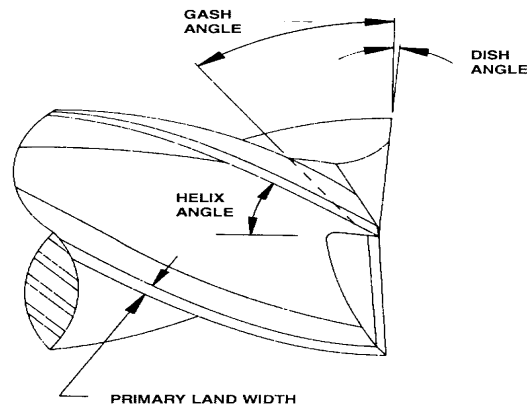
Dish Angle, Gash angle, Helix Angle of milling cutter
